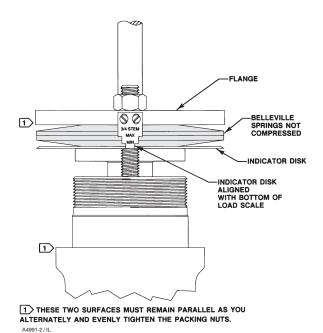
HIGH-SEAL ULF Packing Assembly Showing the Load Properly Adjusted for Decompressed Springs
